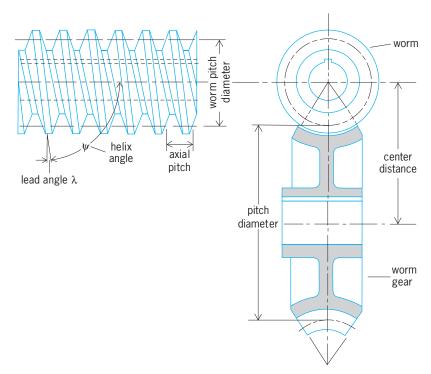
Nomenclature of a single-enveloping worm gearset. Teeth of worm gear are called threads. (After J. E. Shigley, Theory of Machines, McGraw-Hill, 1961)
